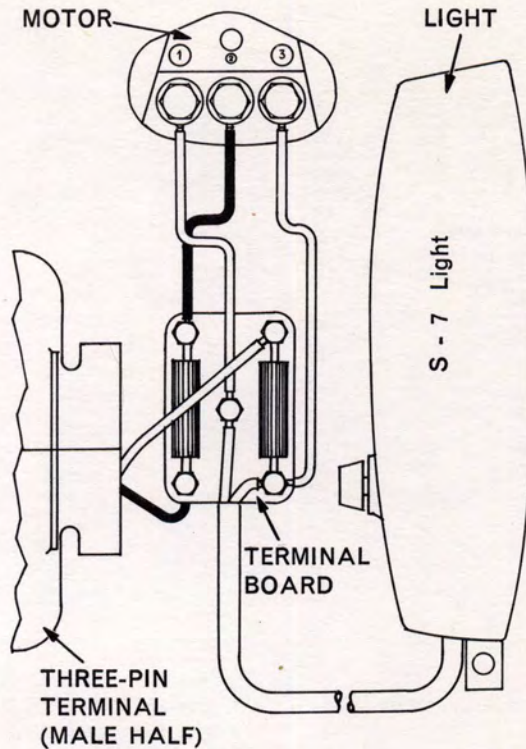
B.A. 60 Motor Terminal Board Connection Guide.
